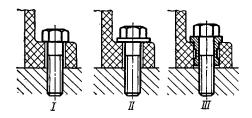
Preventing bearing surfaces of moulded parts from crushing by screw heads
